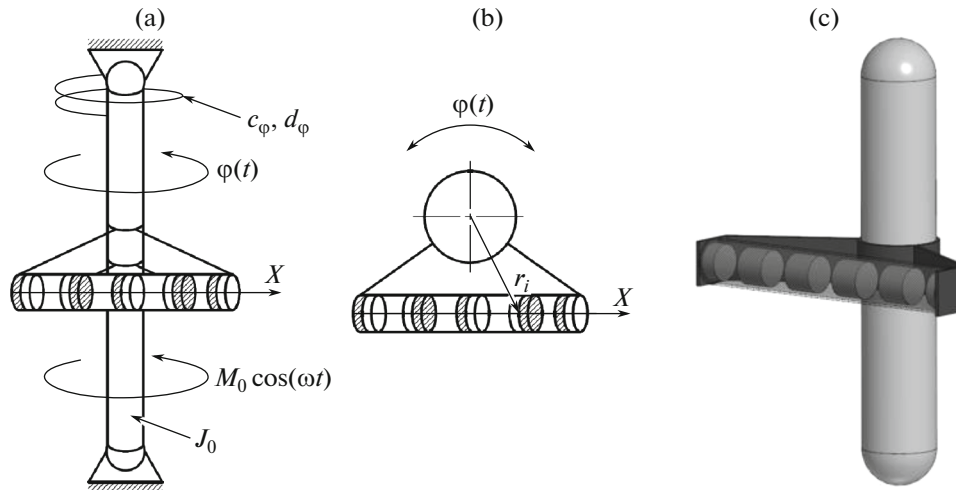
Installation layout of a dynamic damper on an oscillating shaft: (a) mounting of a damper on the shaft; (b) top view; (c) general view of a body with a damper.
